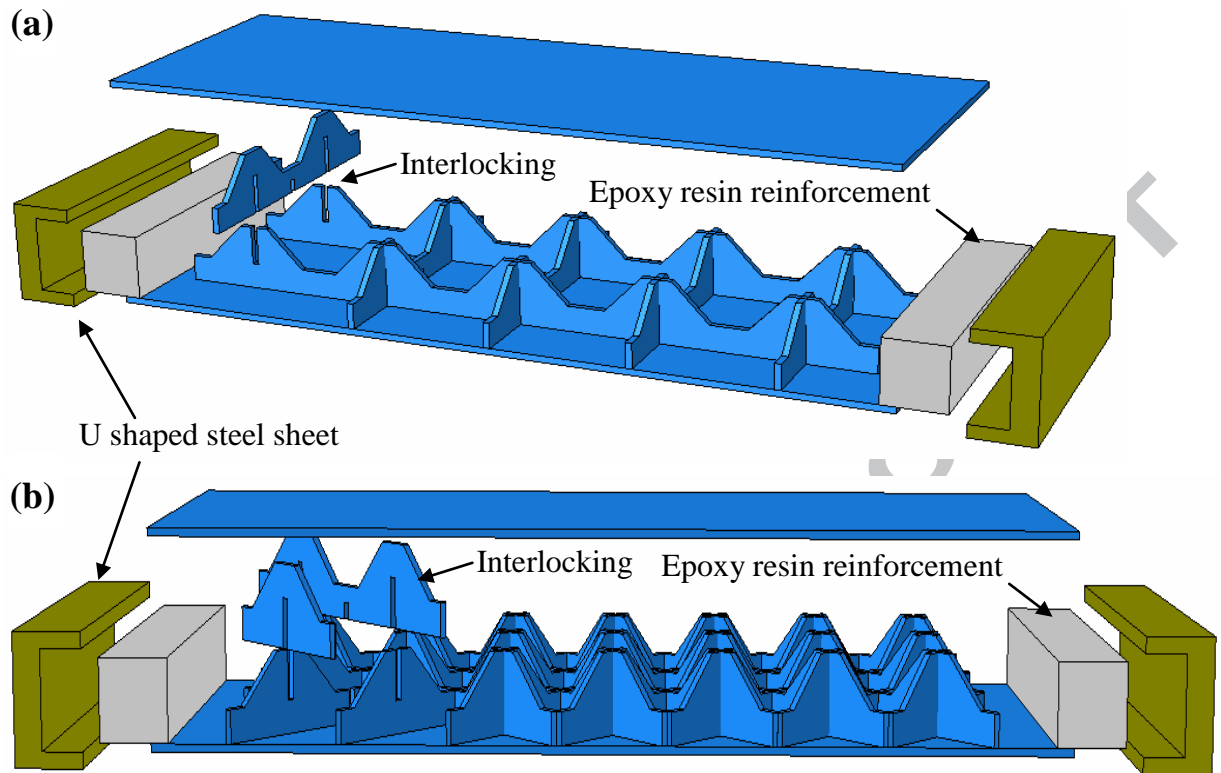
Fabrication of sandwich beams with 3D honeycomb cores for three point bending tests by using cut carbon fiber reinforced composite sheets and interlock method: (a) Egg honeycomb cores; (b) Pyramidal honeycomb cores.
